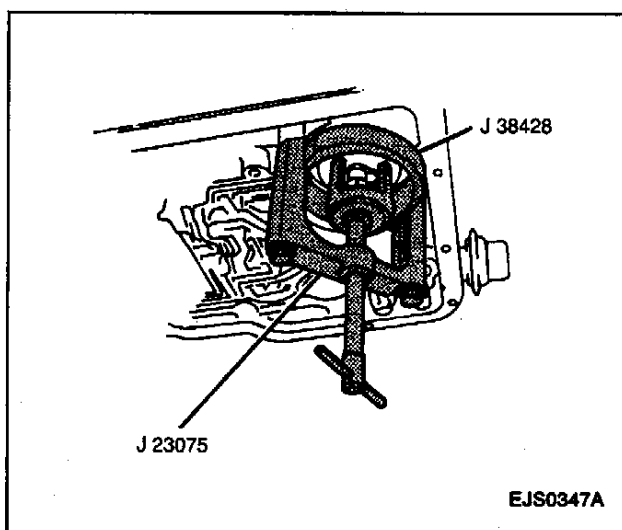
Installing Servo Piston Retaining Ring (3L30, 3-Speed)
